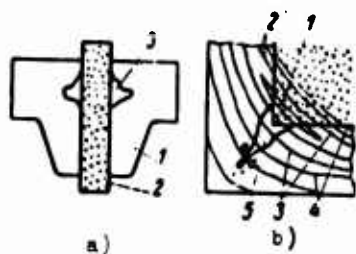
Formation of an open shrinkage cavity: a) in a hole of a small diameter; 1 - casting; 2 - core; 3 - shrinkage cavity; b) at the internal angle of a thick-walled casting; 1-4 - isotherms in the body of the casting and mold; 5 - shrinkage cavity.
